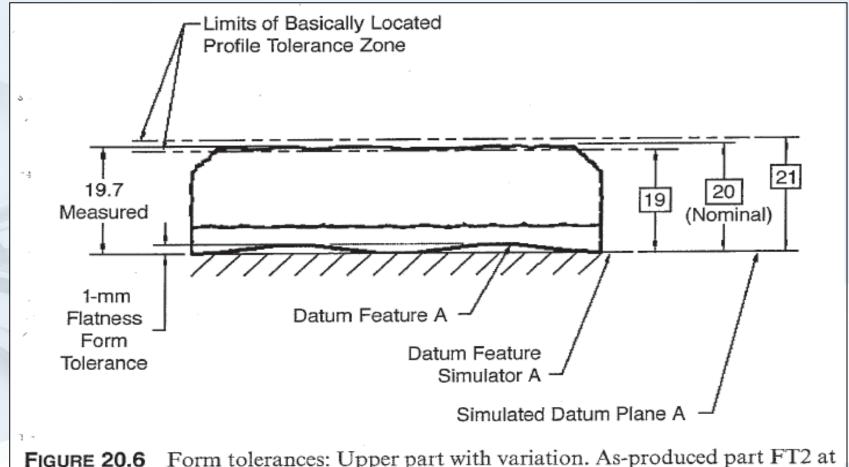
Form tolerances: Upper part with variation. As-produced part FT2 at inspection.
